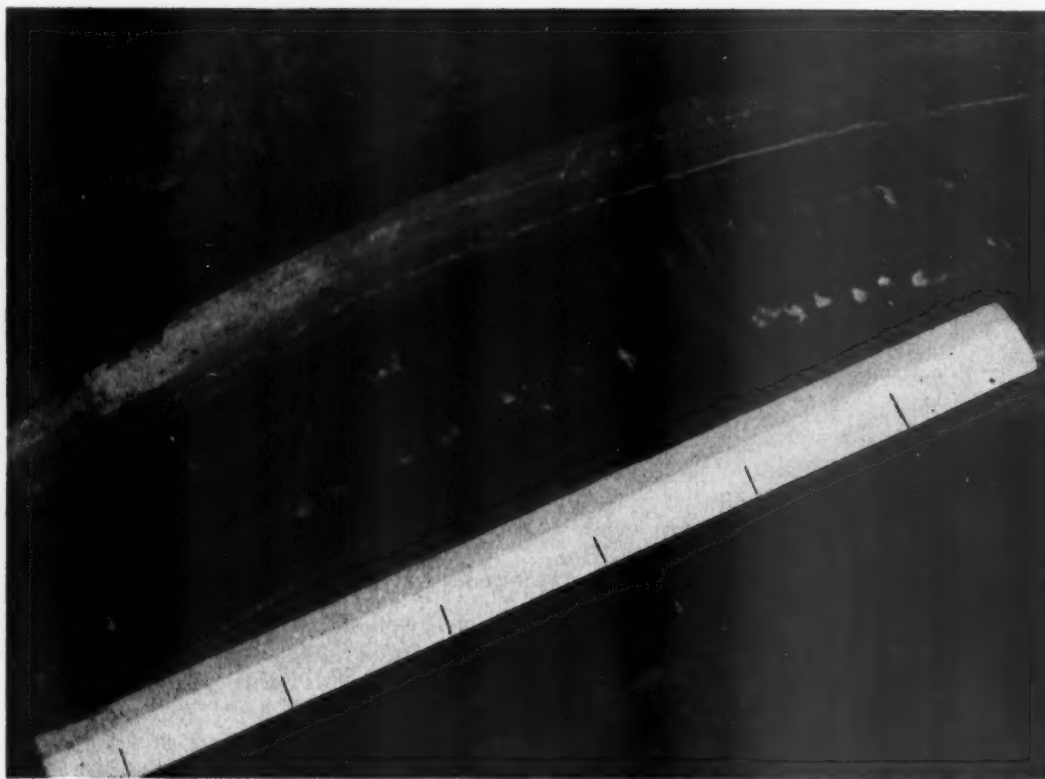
Typical oxygen cell or crevice corrosion occurring in the head seating area of a diesel engine.
